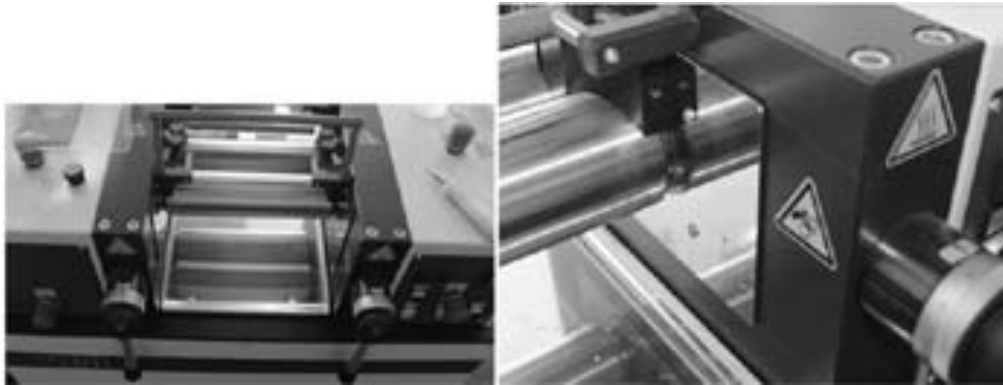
Homogenization machine with detail of rotating heated rollers and hot parts (right)
